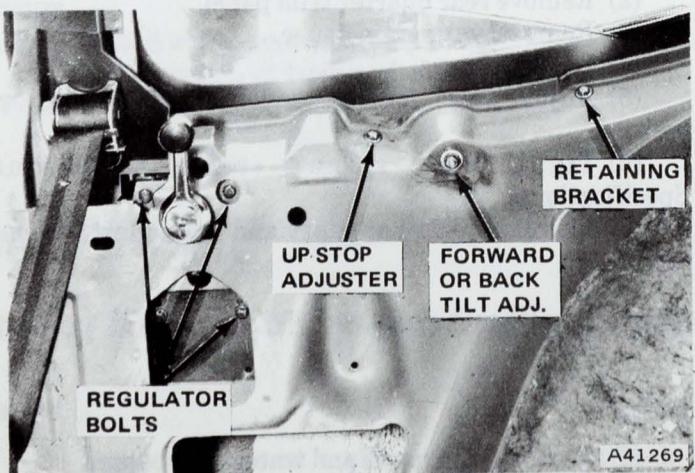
K-15 Rear Quarter Glass Adjustment—Matador Coupe
